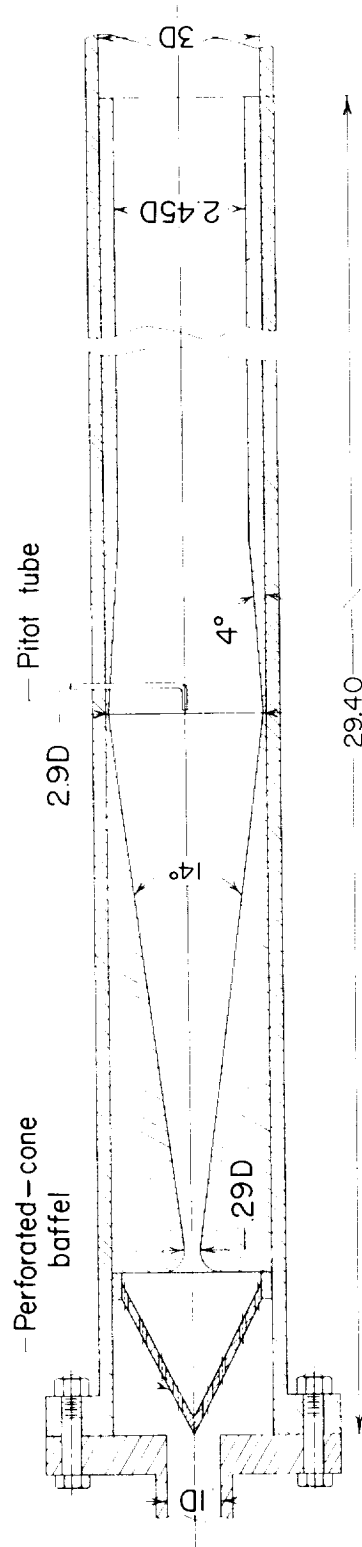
Detailed sketch showing cross section of closed test section. All dimensions are in inches.
